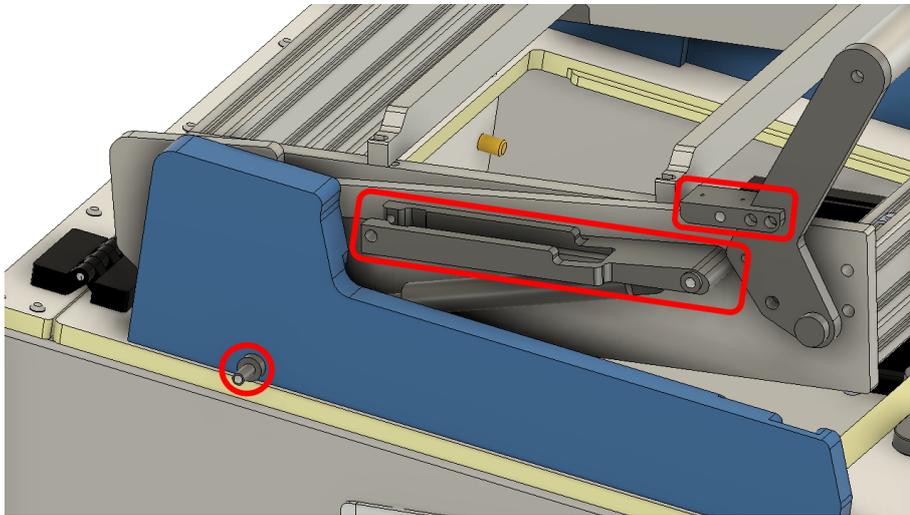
All cylinder fastening parts mounted to the FCT-fixture. The parts are circled in red.
